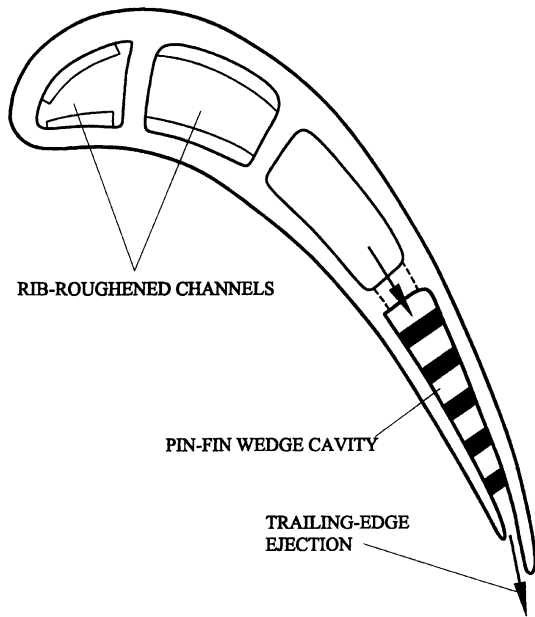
Cross-sectional view of the modern internally cooled turbine blade.
